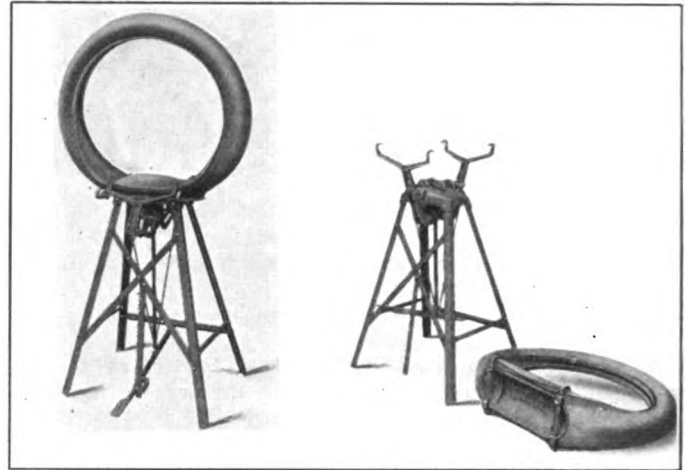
TIRE SPREADER THAT NOT ONLY SPREADS THE CASING TO ENABLE REPAIRS TO BE MADE, BUT ALSO TURNS IT INSIDE OUT AT ANY DESIRED POINT FOR INSPECTION
